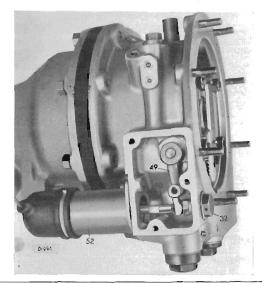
View of unit from right-hand side showing solenoid cover removed
